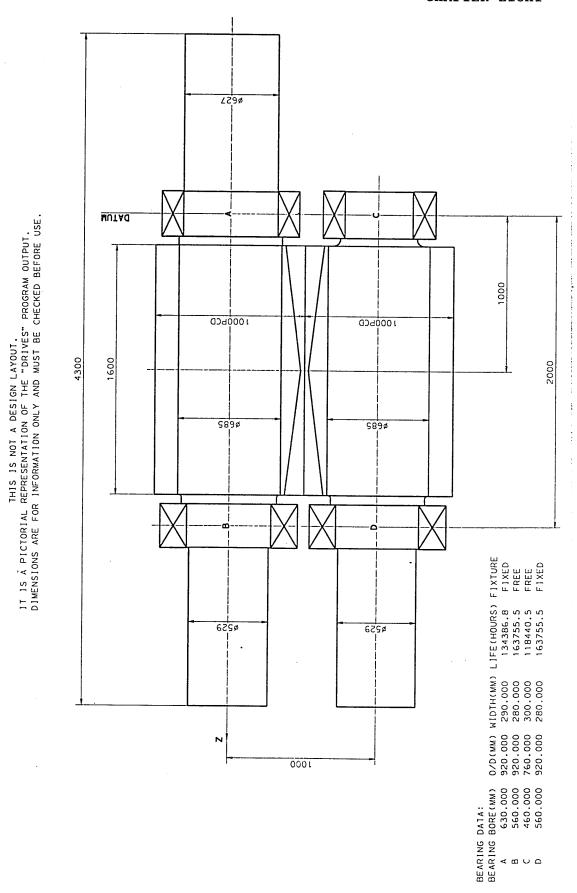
Layout of Stand Fl Mill Pinion Housing
